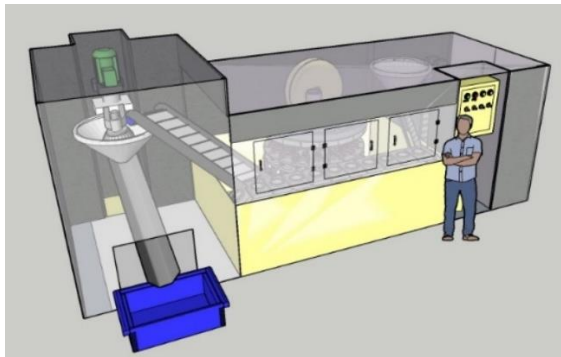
Welding threading machine damper using polyurethane foam
